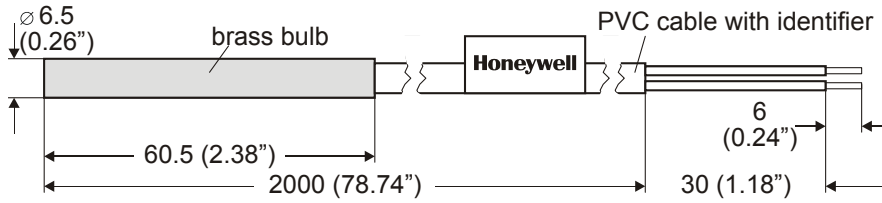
Dimensions of the cable-type bulb sensor in mm (inches)
